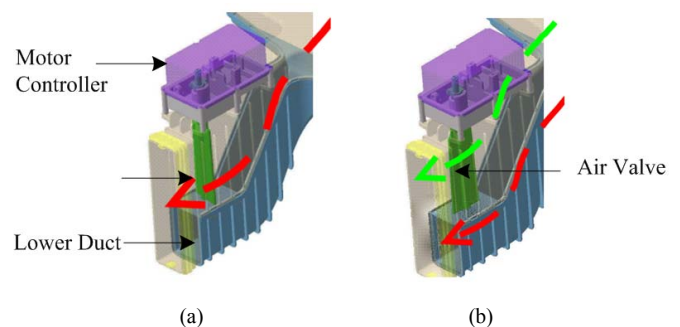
Air intake valve system (a) Valve close (b) Valve open
